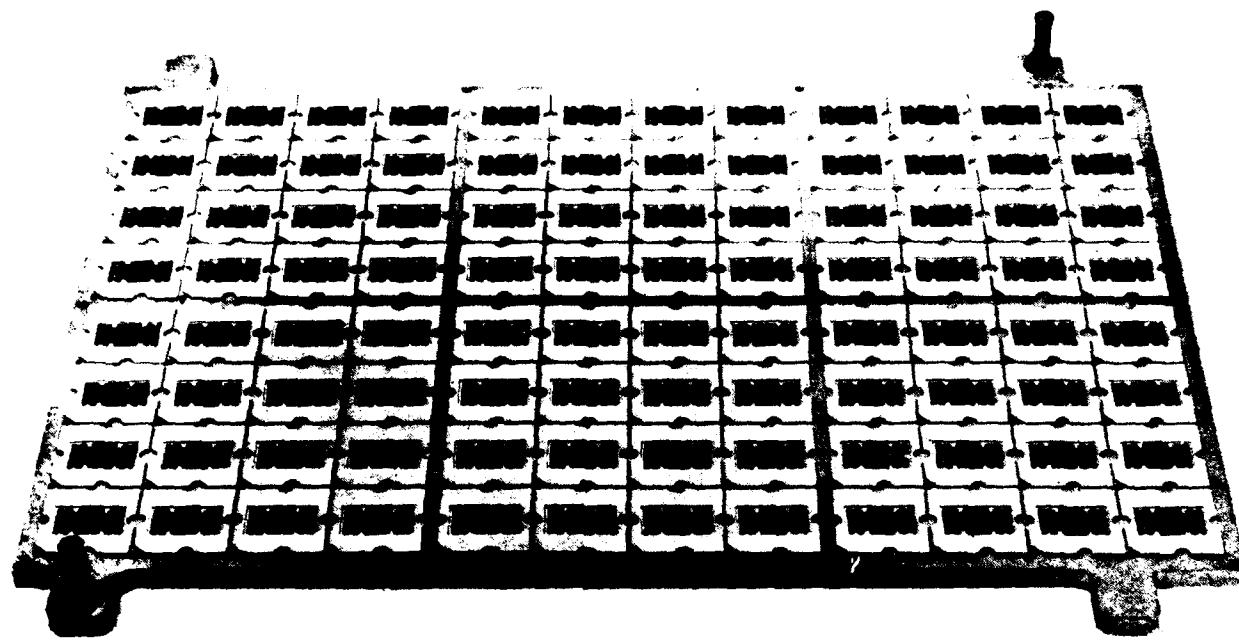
Burn-in Tray Populated with 96 Slide Carriers Prior to Assembly
